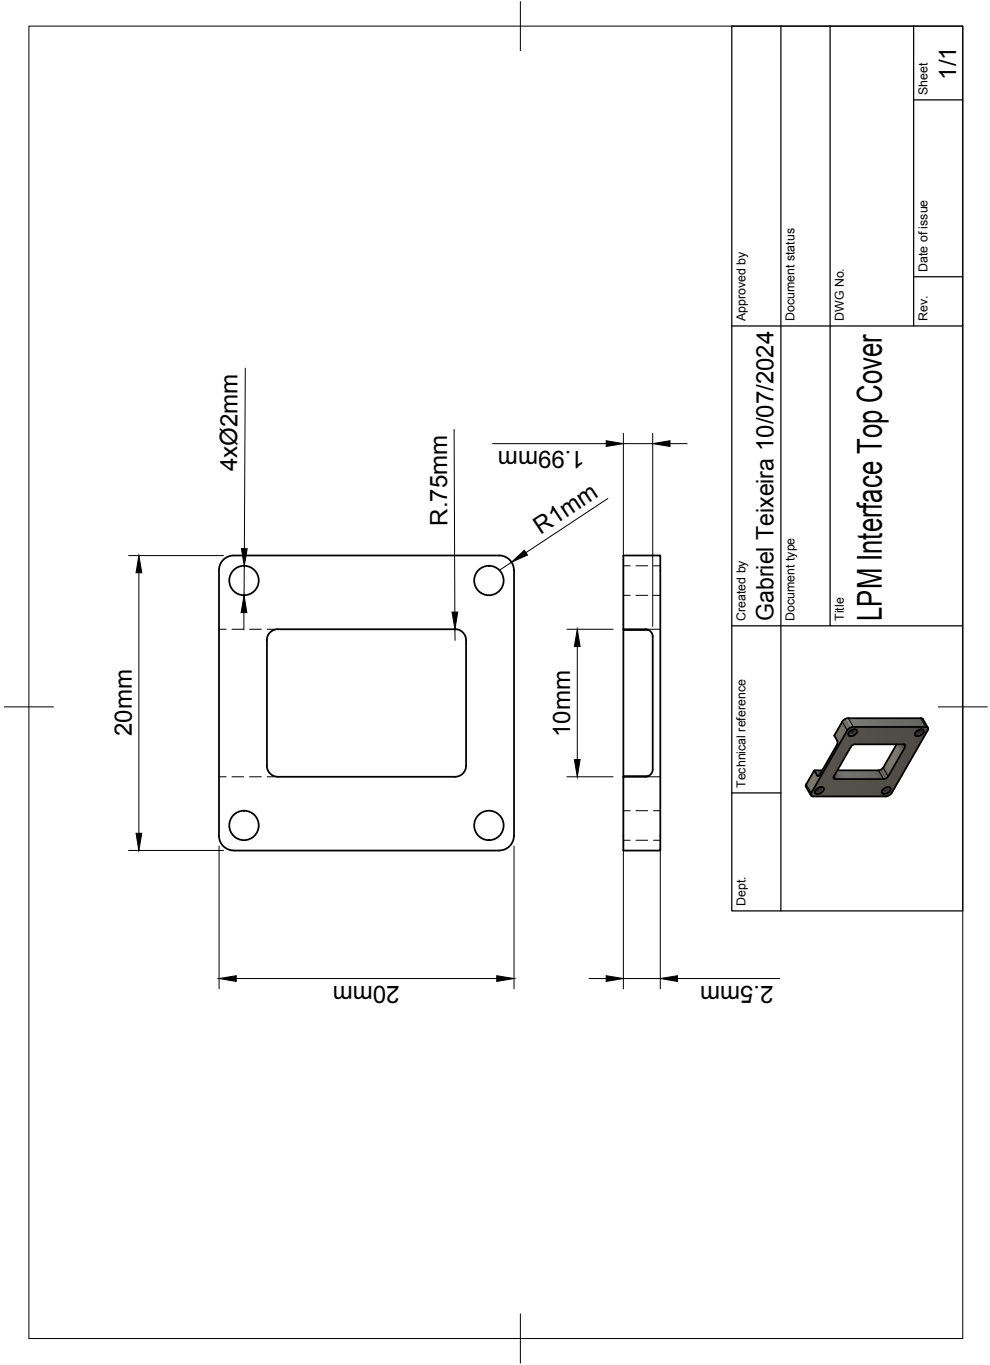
Engineering drawing of the front cover of the LPM interface.
